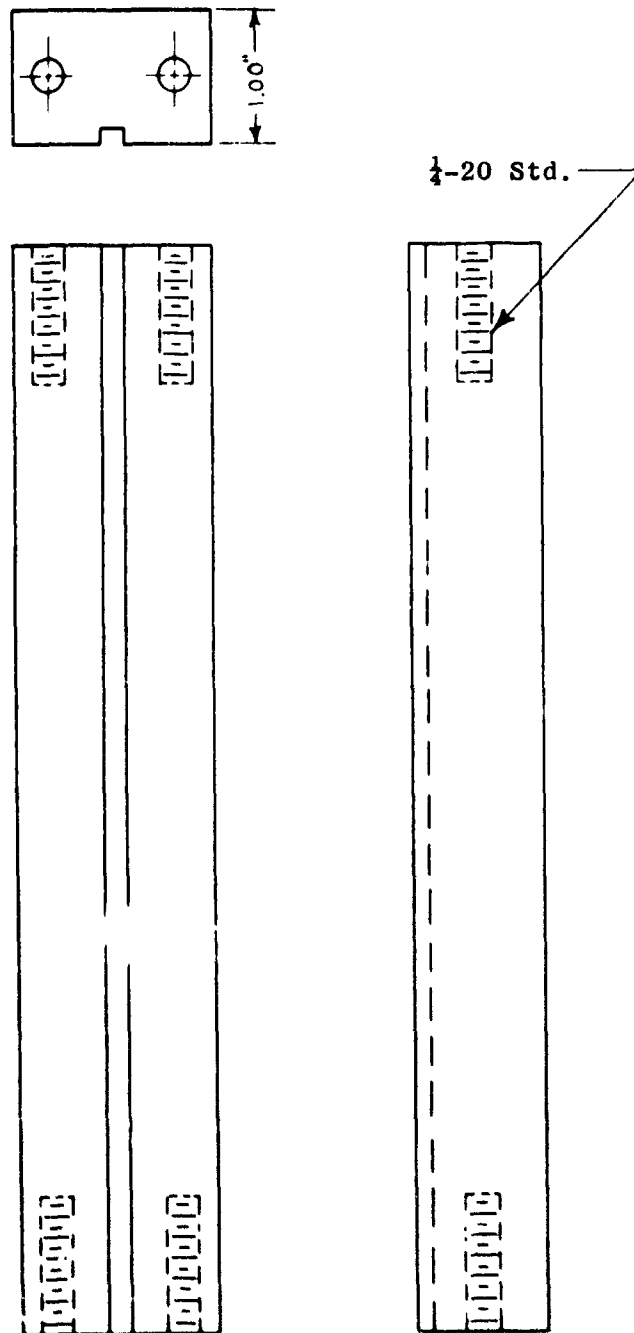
WORKING DRAWING OF RIB OF SLIDE WIRE GAGE
